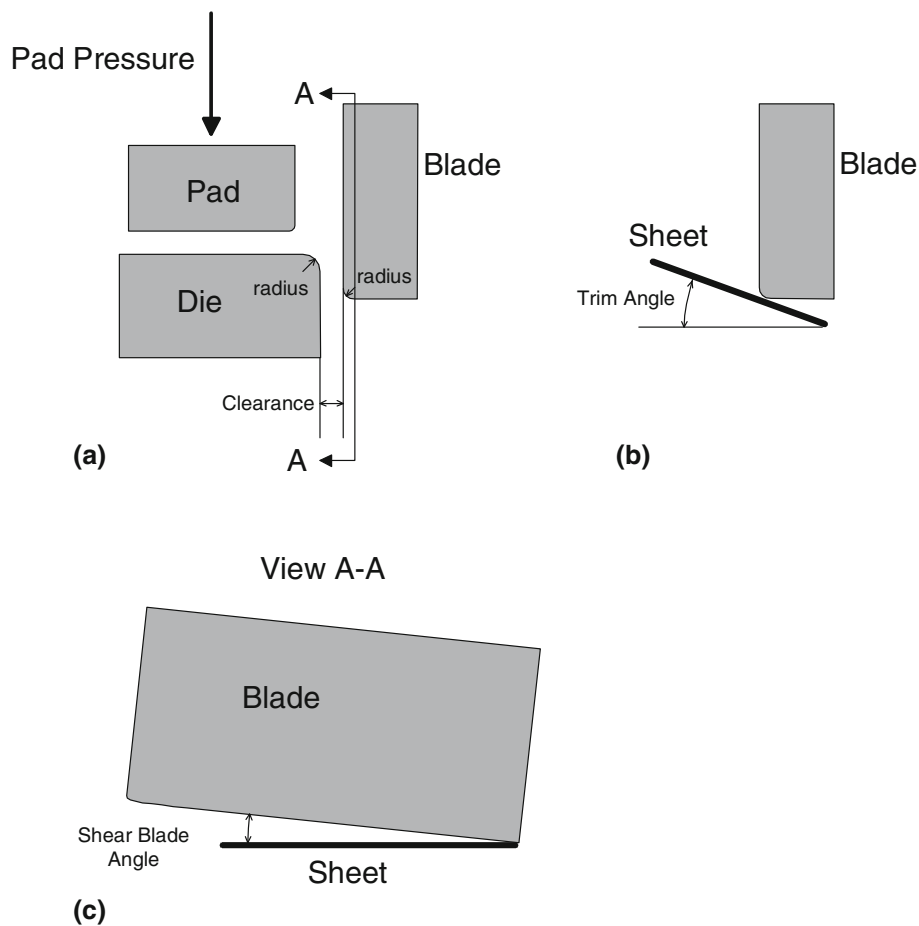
Process variables in shearing. (a) Shear blade, die, pad and clearance, (b) trim angle, (c) shear blade angle
